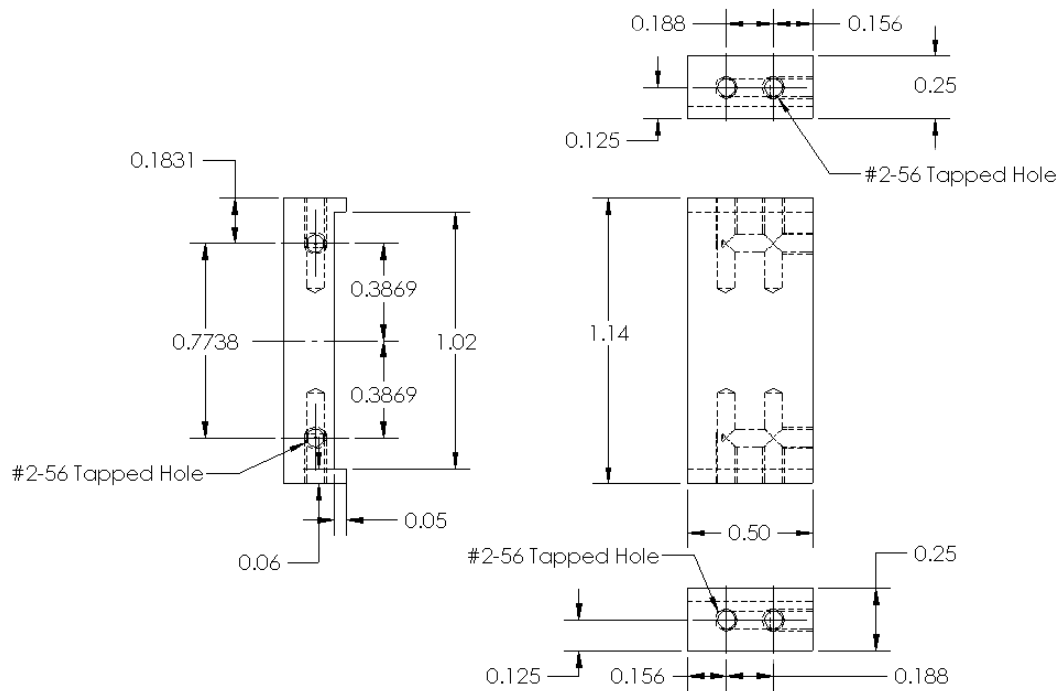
Dimensions of the center attachment block of the shear strain extensometer. All dimensions are in inches.
